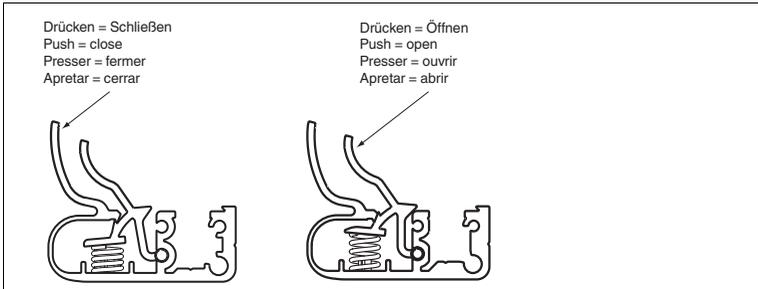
Opening and closing of the mounting aid OMH-SLCT-01
